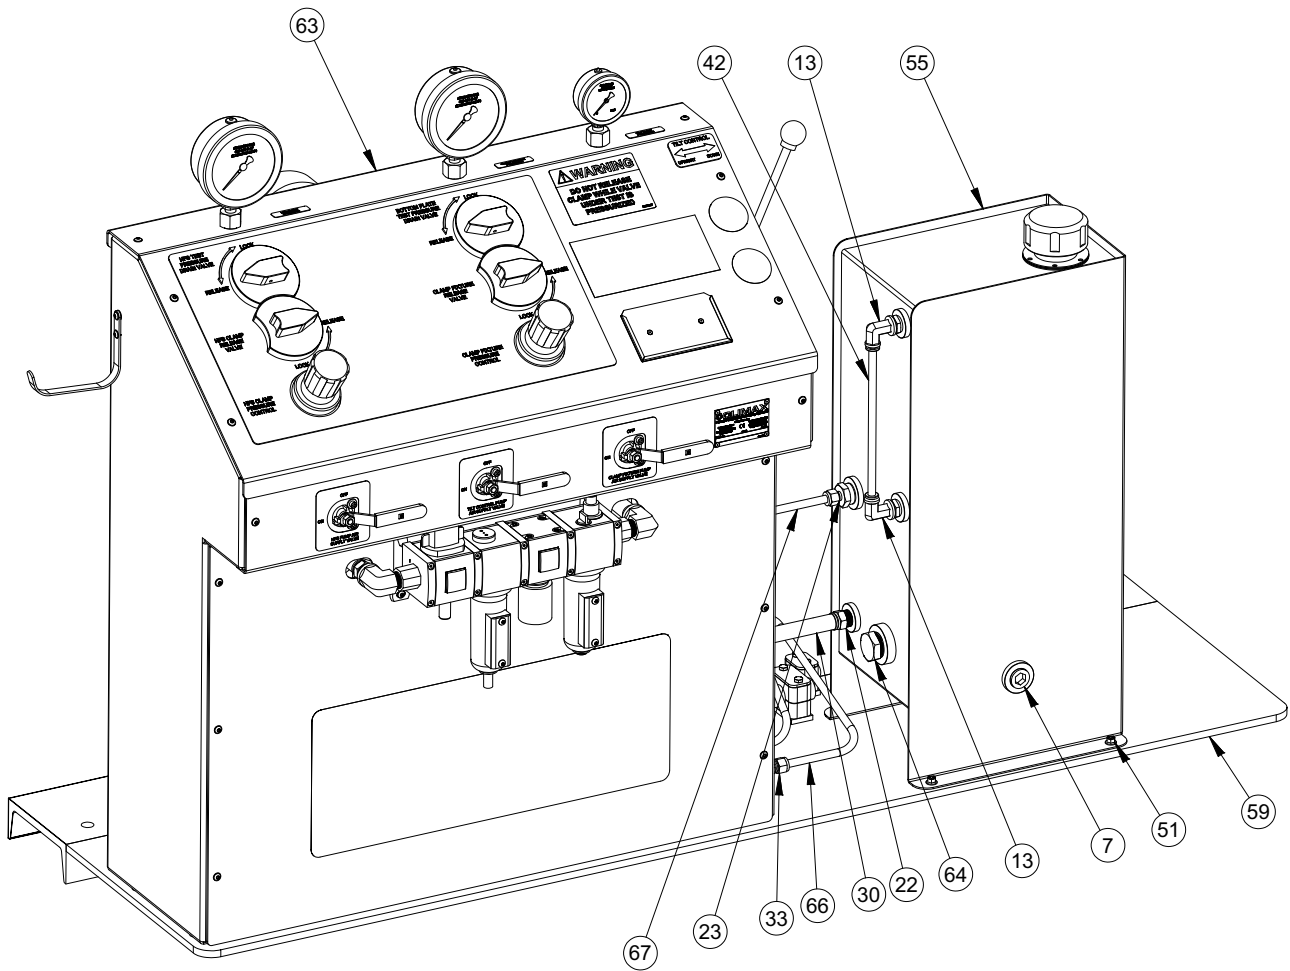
UFV-14-165T CONSOLE FRONT ASSEMBLY (P/N 88469)
